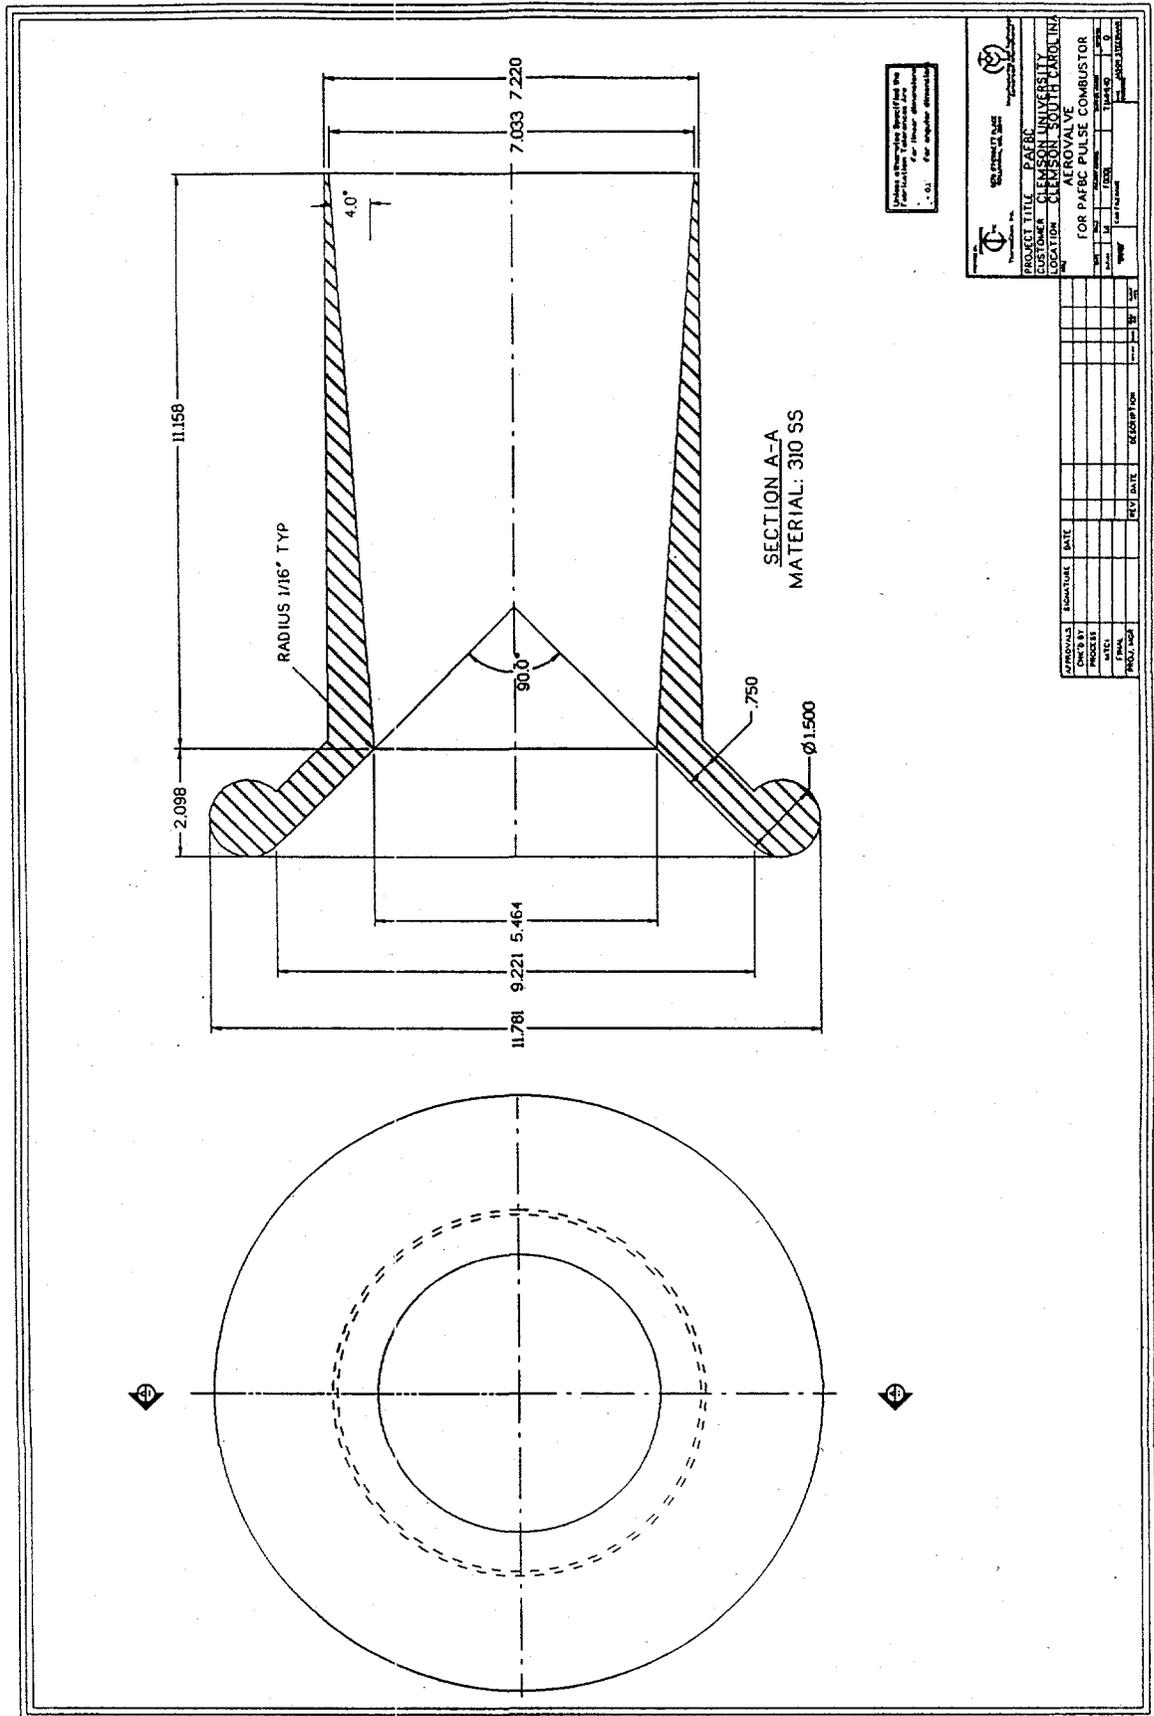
AEROVALVE FOR PAFBC PULSED COMBUSTOR
